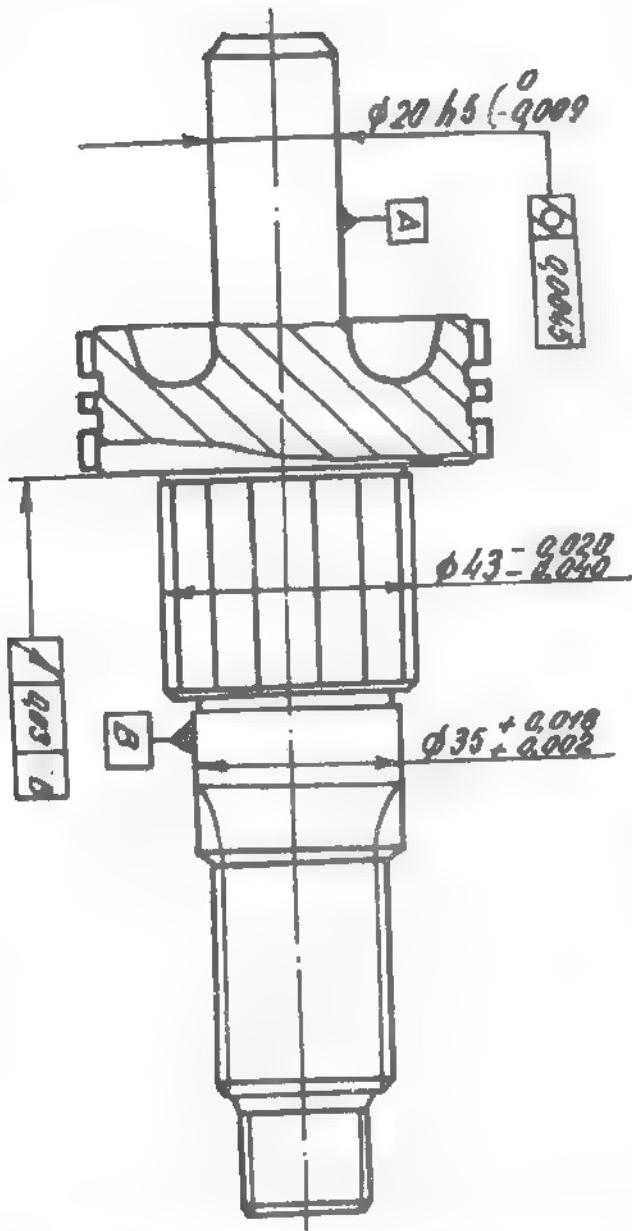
108. TRANSFER BOX REAR PROPELLER SHAFT DRIVE SHAFT.
